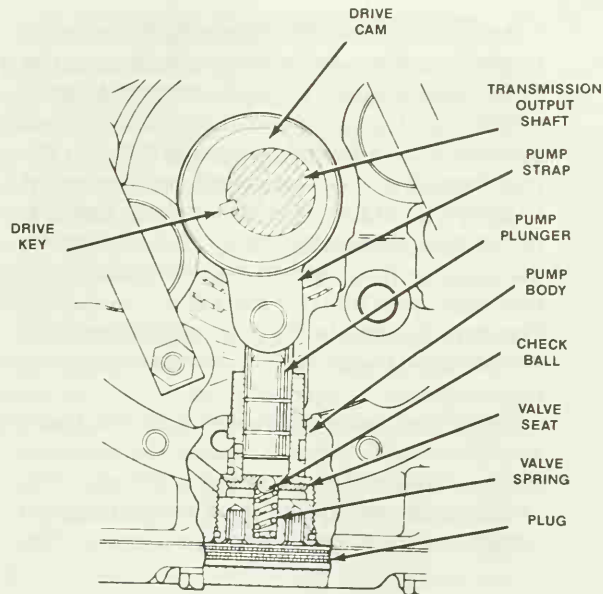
Overdrive hydraulic pump and valve assembly. (American Motors Corporation)
